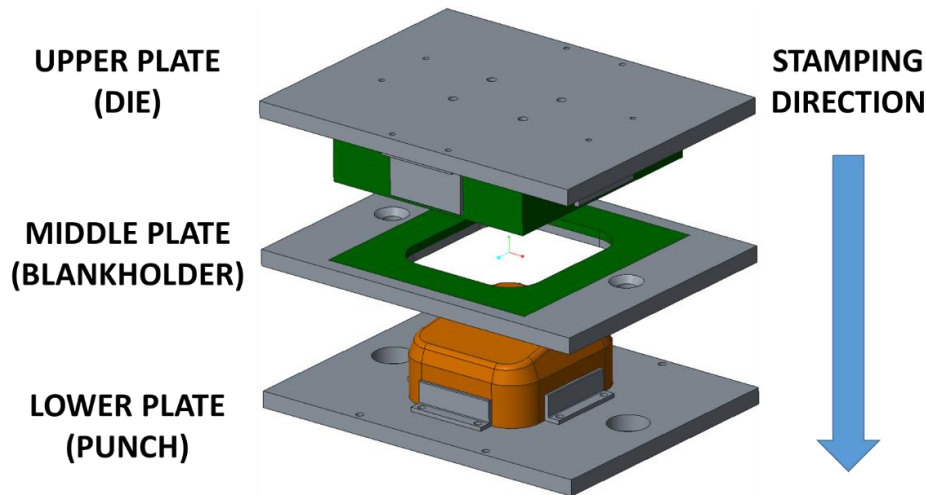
9: scheme of the entire tool assembly and the stamping direction.
